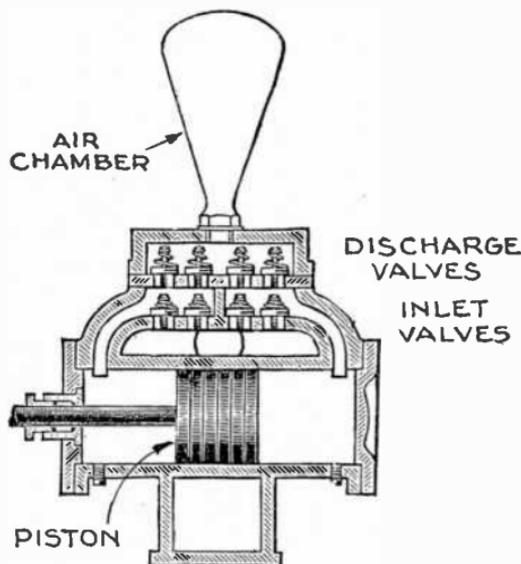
,821.—Double acting piston pump, water end, showing sectional view of piston, cylinder, stuffing box, valves, and water passages. The lower row of valves are the inlet valves, and the upper row the discharge valves.
